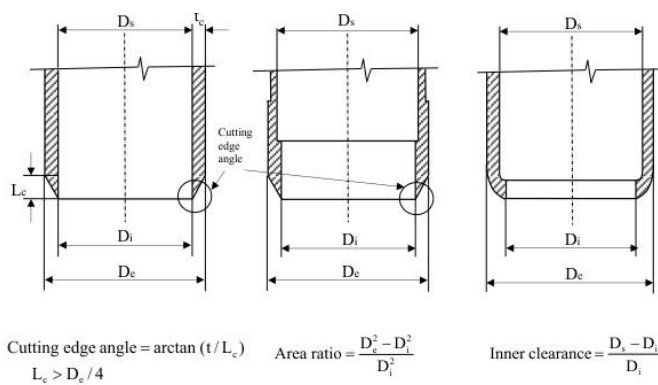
Tube sampler parameters: (a) cylinder without inner clearance, (b) sampler with screw on cutting shoe, and (c) cylinder with rolled and reamed cutting edge (Mataic, 2016)
